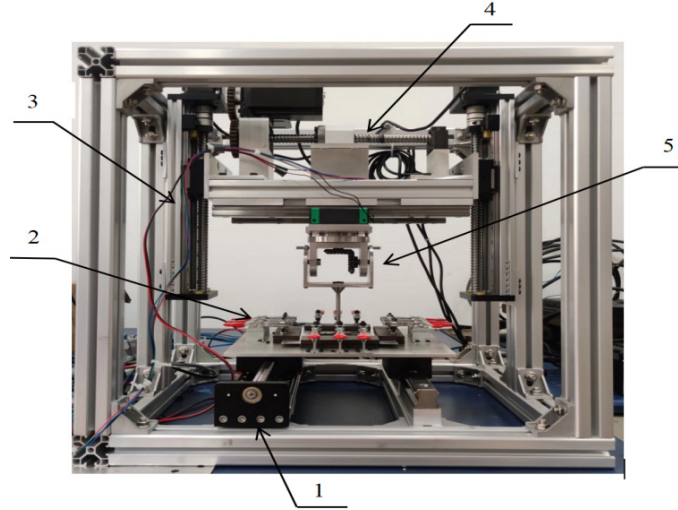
Actual device photo: 1-X-axis; 2-fixture; 3-Z-axis; 4-Y-axis; 5-Forming tool.
